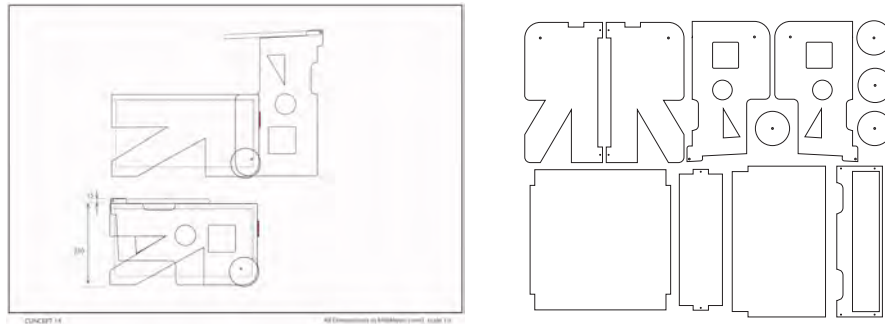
My technical drawings were converted into 2D shapes for cutting process. Left image show the technical drawing and the right image shows the 2D shape for every panel/part.
